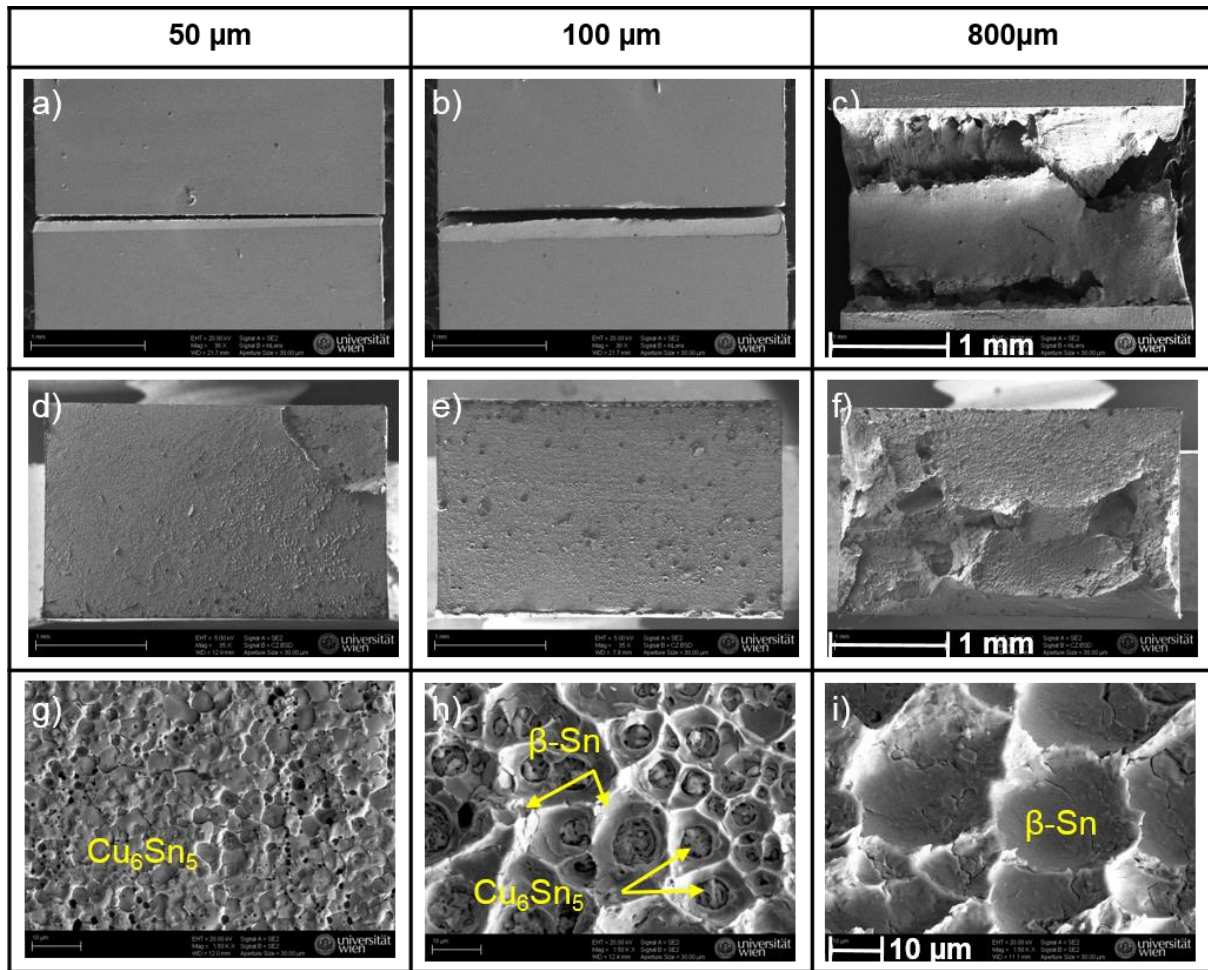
Plane view of the tested non-aged solder joints with a gap size of 50 μm , 100 μm and 800 μm (a-c) and their respective fracture surfaces (d-i).
